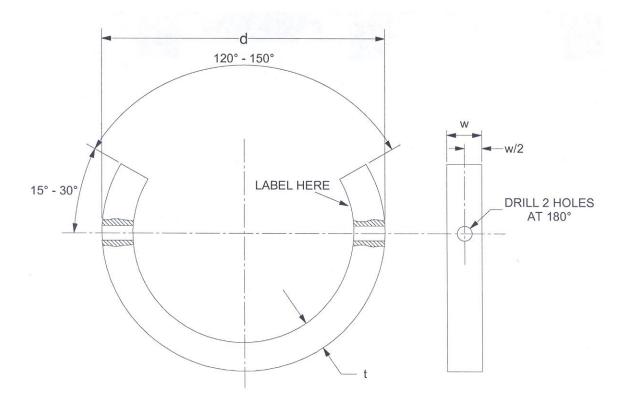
Dimensional Drawing of the C-Ring Test Specimen
